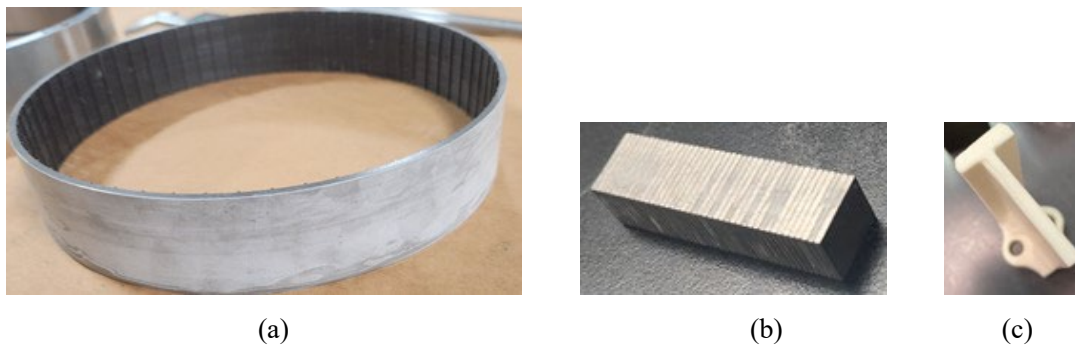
(a) Prototype rotor, (b) one magnet with 43 segments, and (c) 3D printed heat exchanger.
